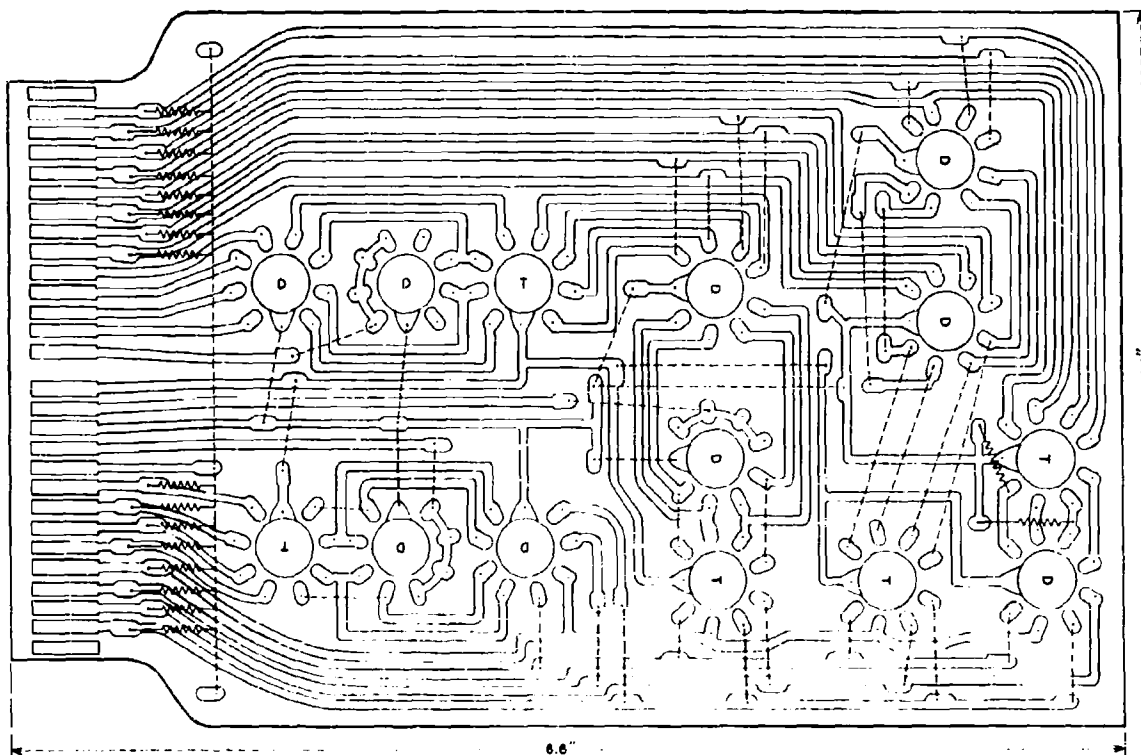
Layout plan of 4-bit register on printed-wire board using T05 header assemblies with internal resistors.
